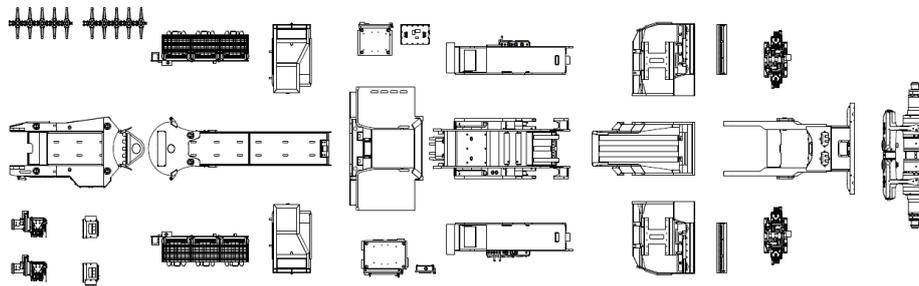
Preparation method of subassemblies of the JOY 12CM30 machine for an assembly [130]
